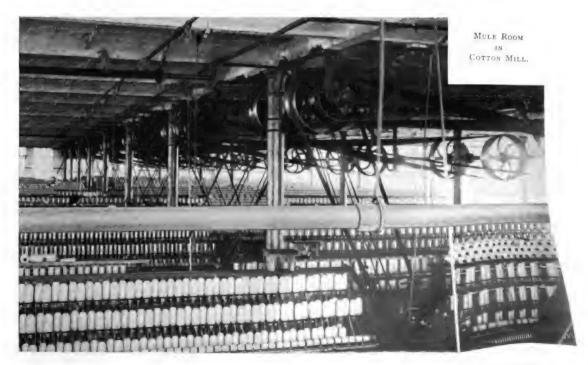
Showing the Millwrights' Work for Mule Driving in a 90,000 Spindle Lancashire Cotton Mill.
